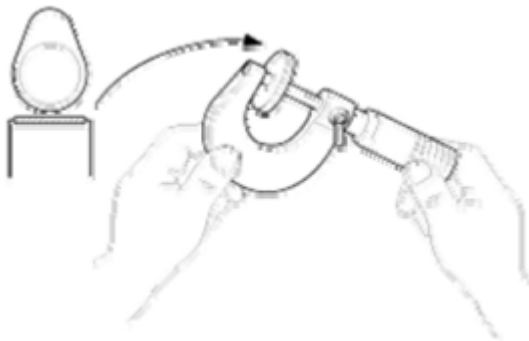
Measuring Thickness Of Shim Using A Micrometer
